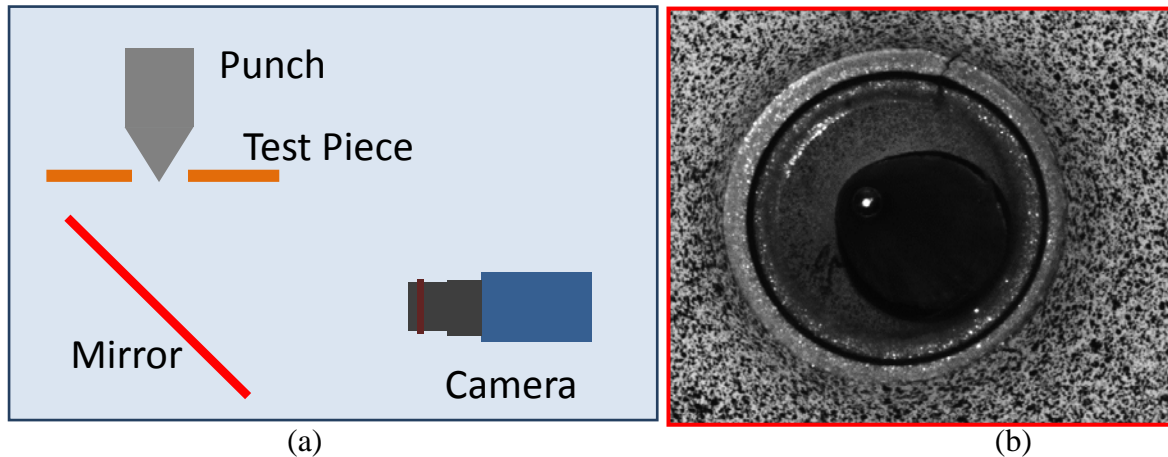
(a) Schematic of camera arrangement in a hole expansion test, (b) captured image of specimen after fracture observed
